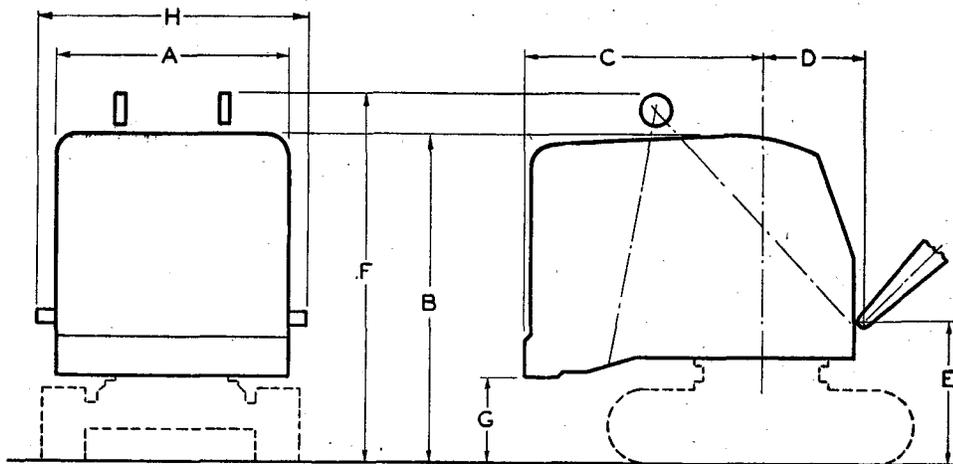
Cab dimensions, crawler mounting (paragraph 4.14).
